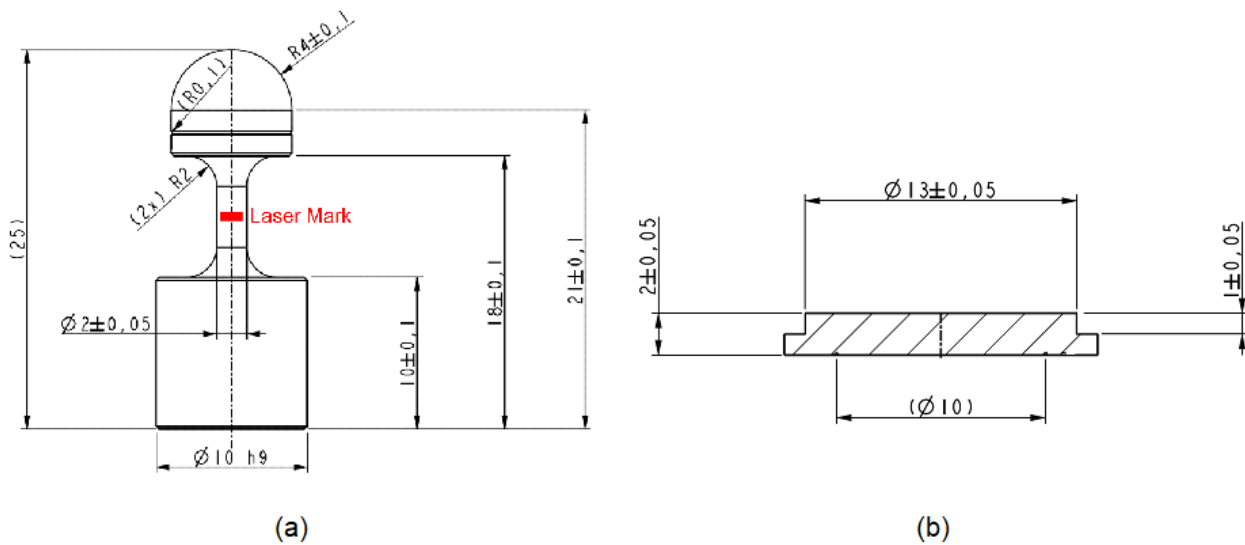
Technical drawings of (a) specimens manufactured for fatigue testing and (b) discs cut for metallographic characterization. All dimensions are in mm.
